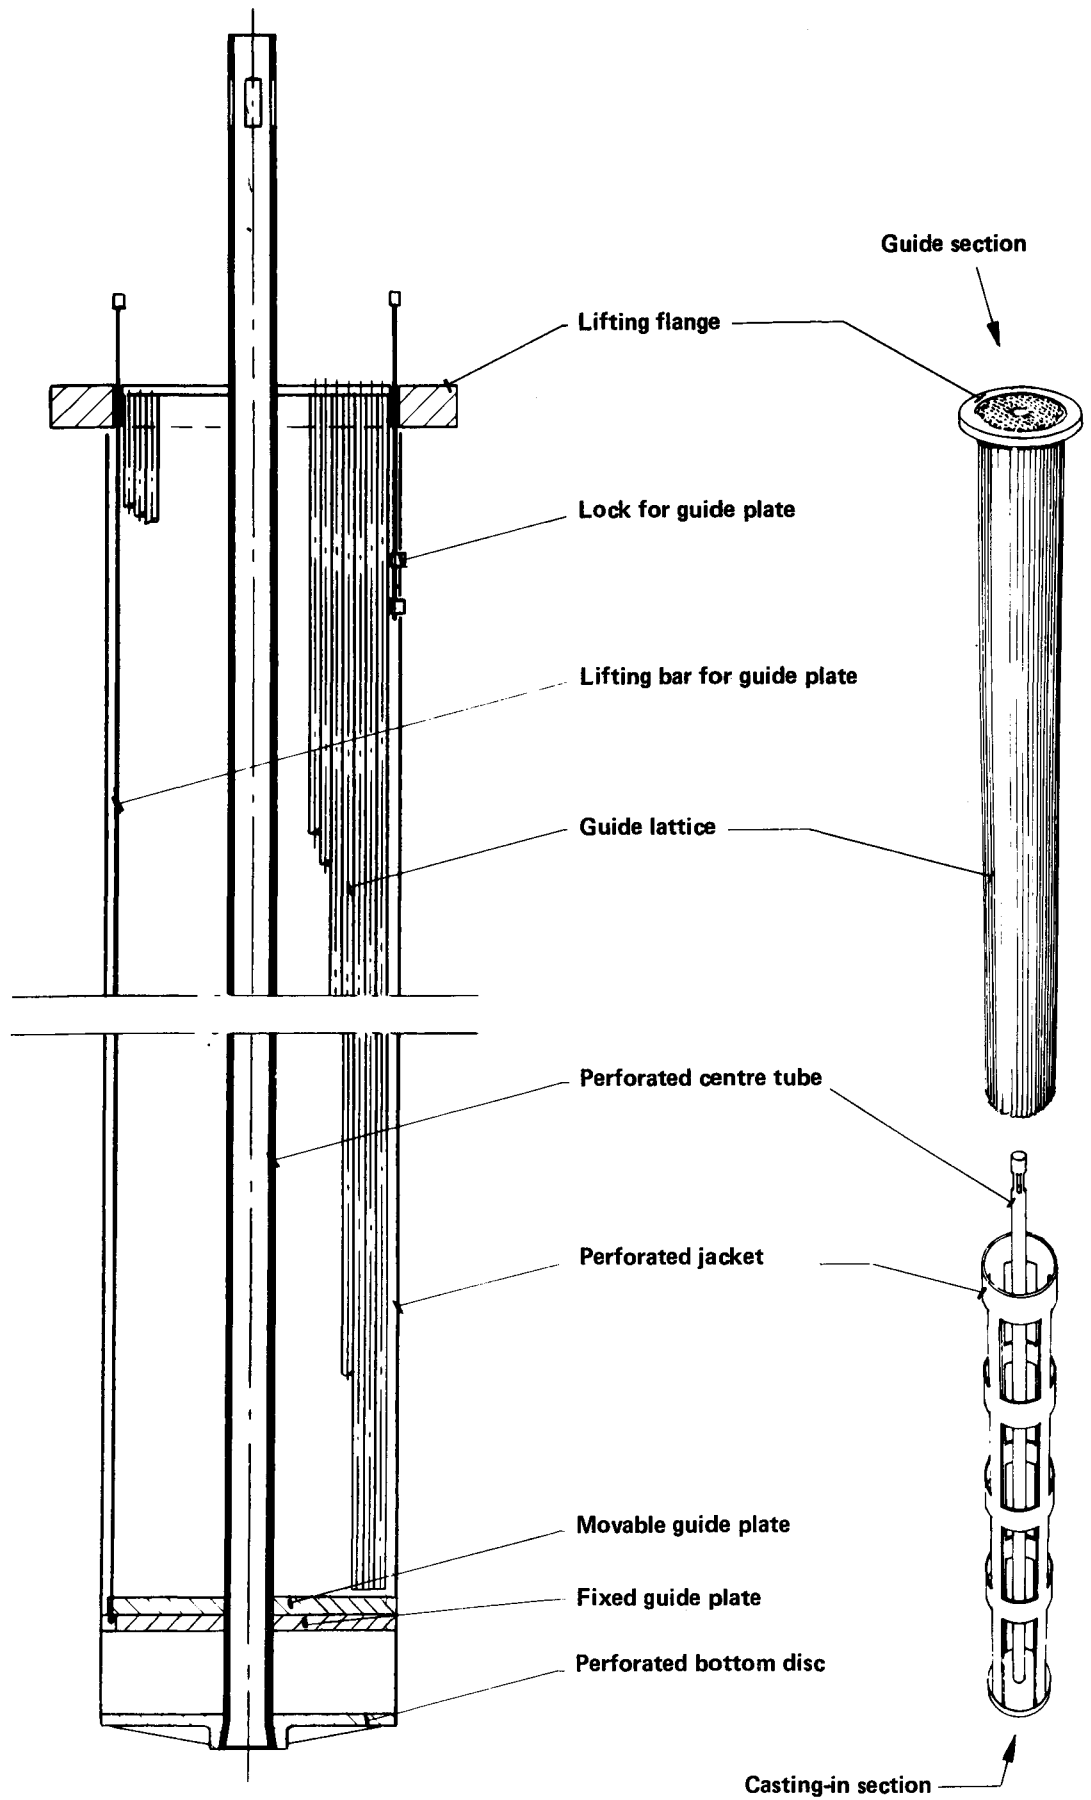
Copper rack for fuel rods. The guide section is used to pack the rods into the casting-in section.
